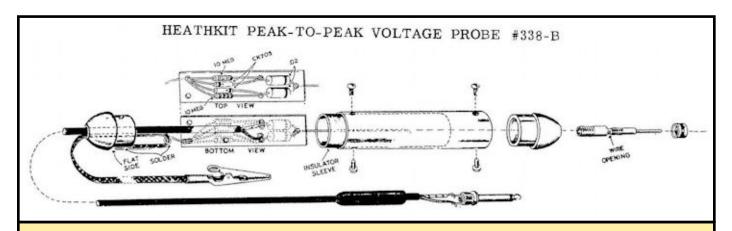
Assembly drawing of the #388-B probe using the later probe housing. Note phenolic board with brass rivets in holes for mounting components.
